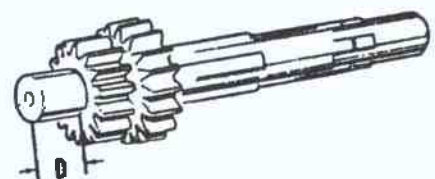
The fourth speed gear and the drive gear are pressed onto the countershaft (layshaft). Distance (D) must be 0.653-0.655 inch (16.58-16.64mm) and clearance between gears should be at least 0.007 inch (0.18mm).
